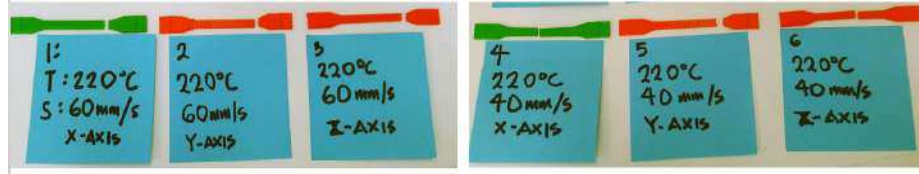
Specimen A1 to A6 after evaluation on the Q test machine.
